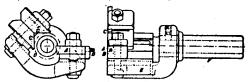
Box Tool for Turret Lathe. (Alfred Herbert, Ltd., Coventry.) A, Cutting tool. B, Screw for adjusting radius of cut. CC. V-steadies supporting the work in opposition to A. D. Diameter of work. E, Body of holder. F. Stem which fits in the turret.
